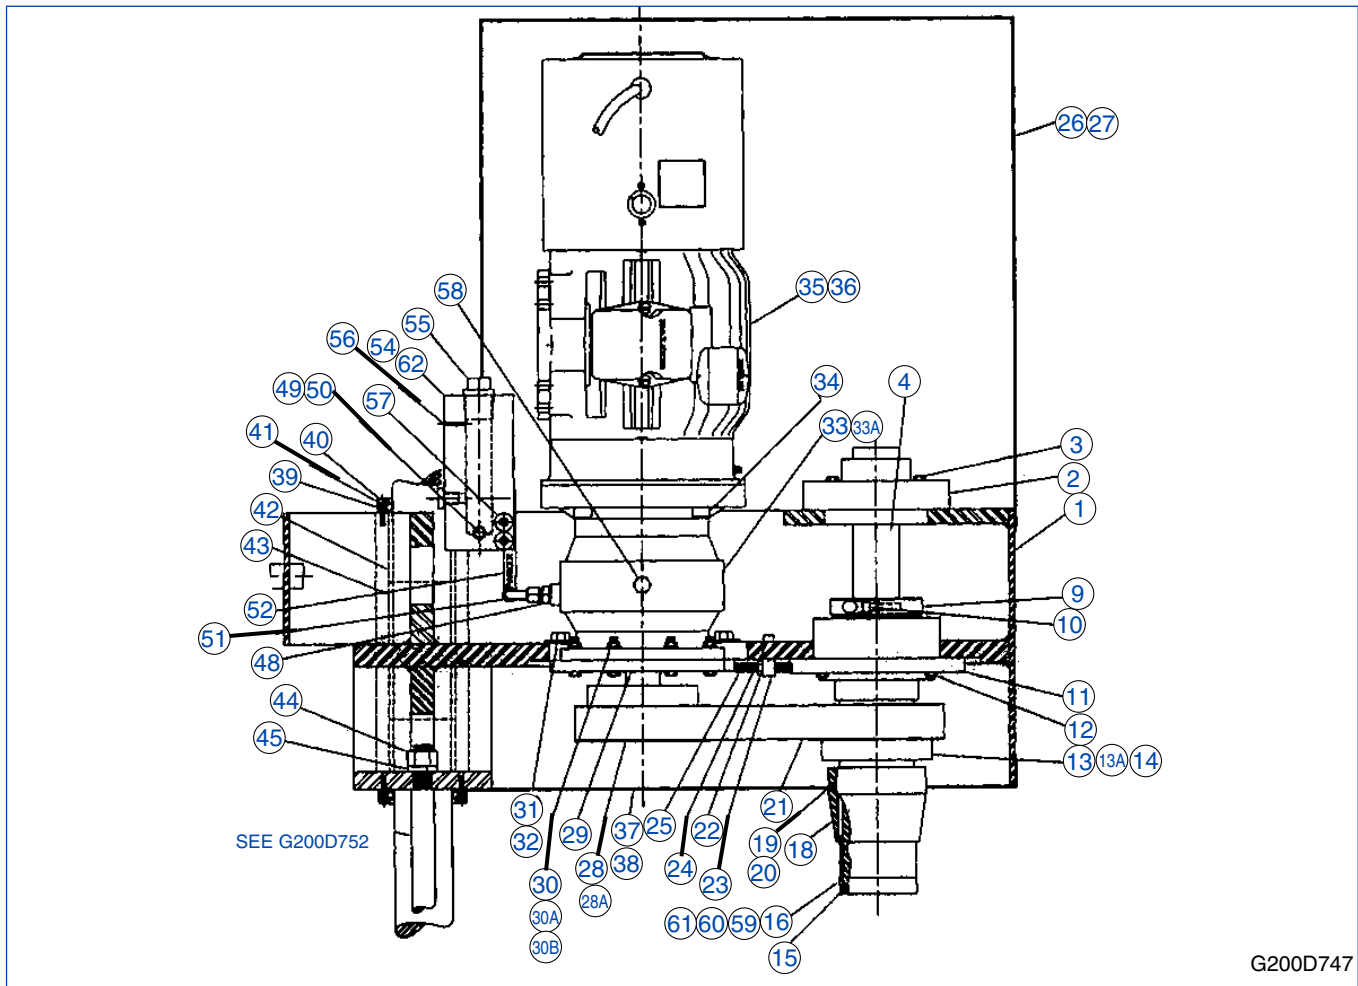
C – SPINDLE CARRIAGE ASSEMBLY
